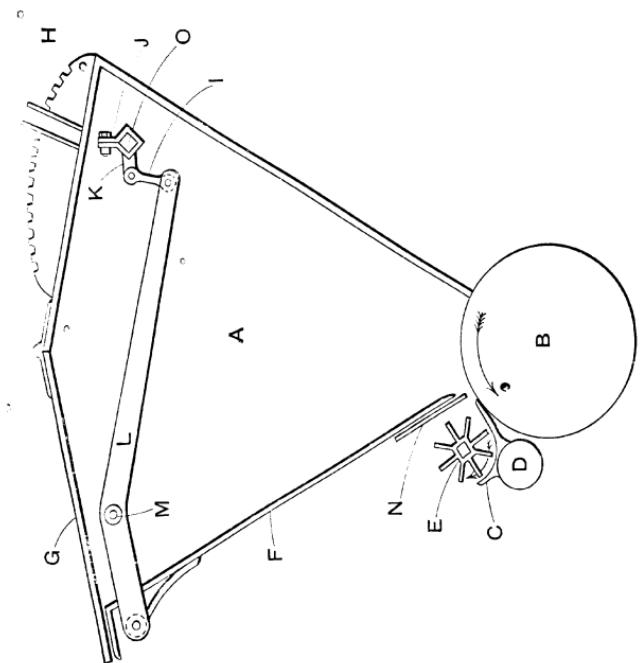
DIAGRAMMATIC SECTION OF MANURE DISTRIBUTOR—SEED DRILL TYPE.
